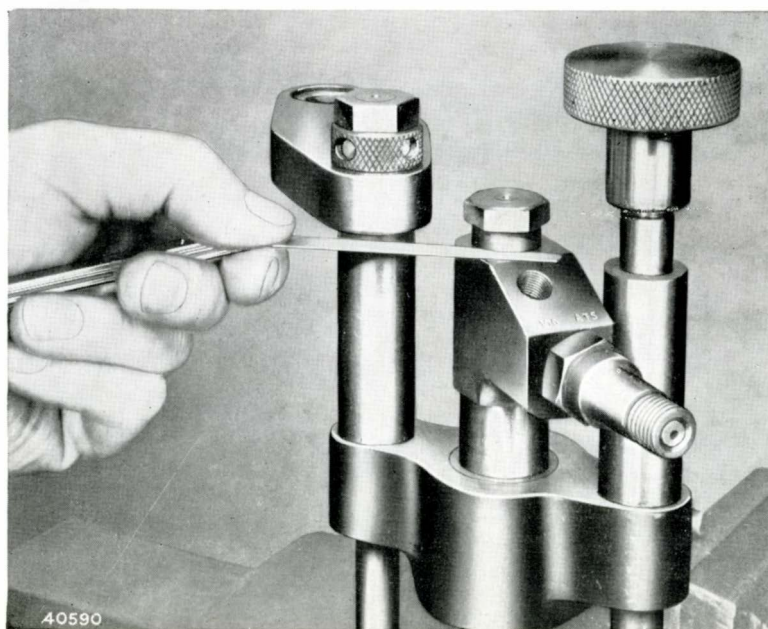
CHECKING THE NEEDLE VALVE LIFT
